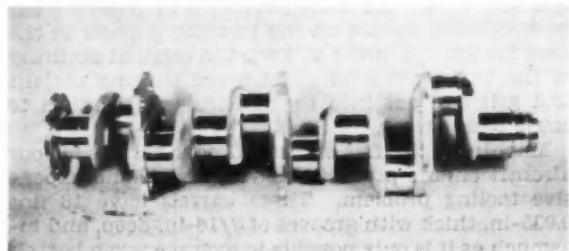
Crankshaft used in 6-cyl opposed aircraft engine.
